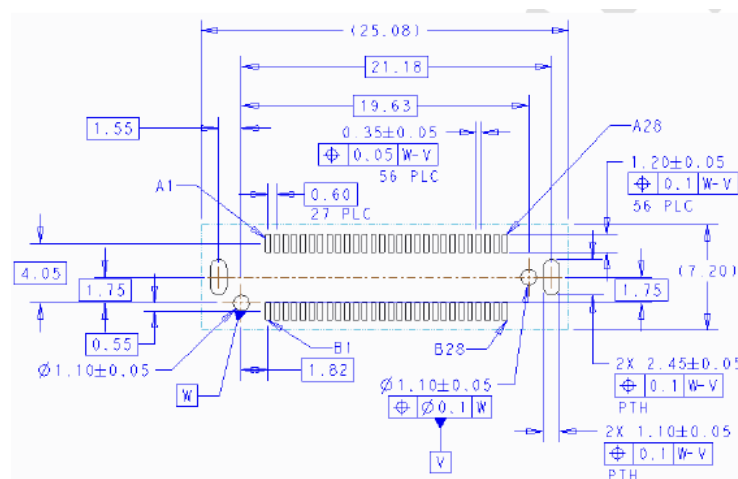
PCB Layout for GenZ VT 1C Unshielded
